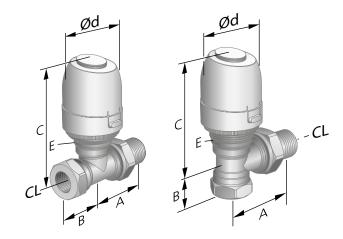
VALVE-S valve and VALVE-A respectively with ACTUATOR valve actuator mounted. $E = M30 \times 1.5 \text{ mm}$ threaded mount
